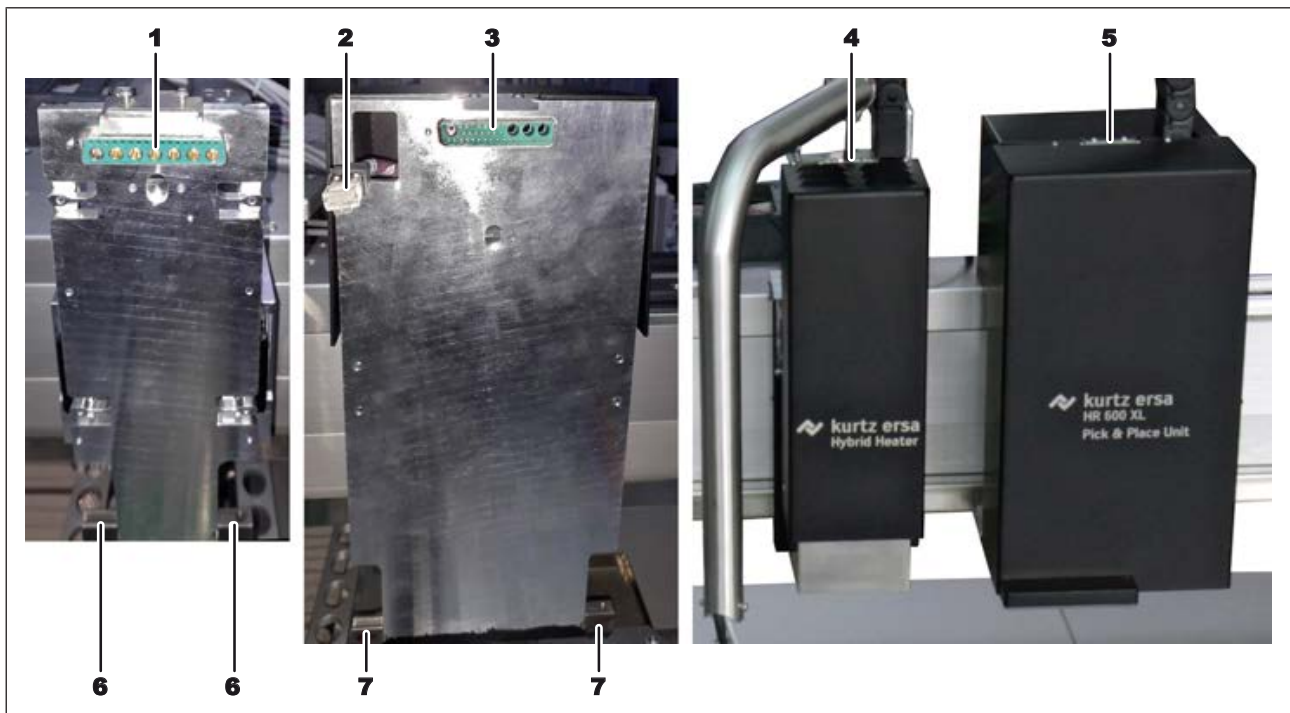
Example images: Heating head holder (on the very left) and placer head holder. Right: Heating and placer heads screwed on.
